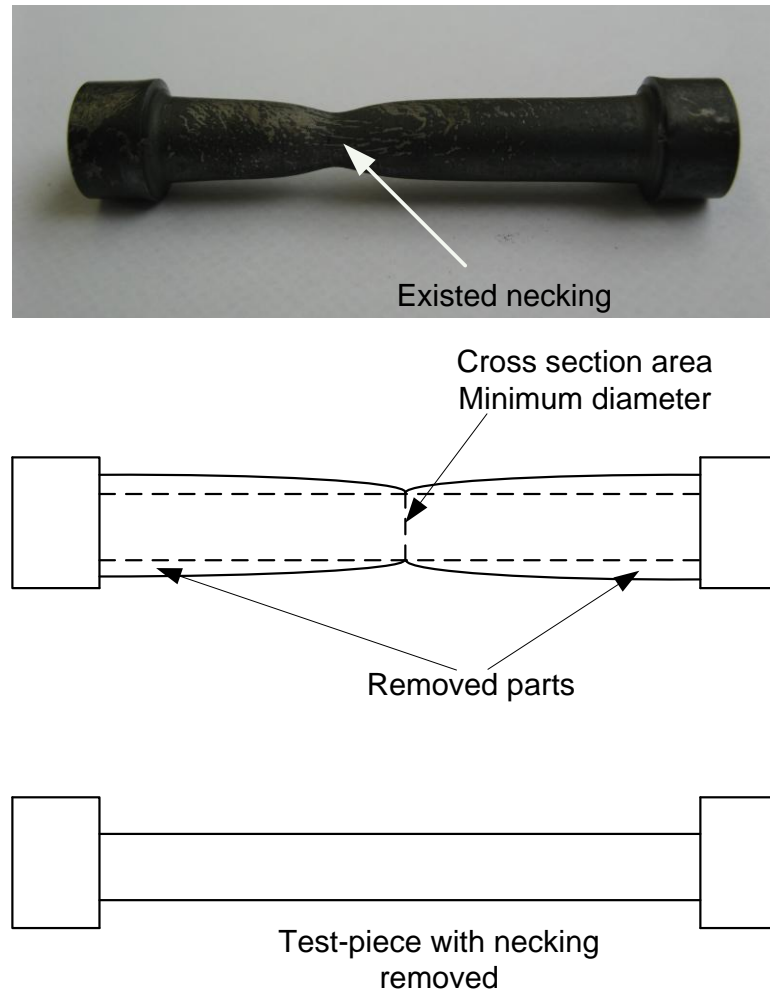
(a) Test-piece with existed necking after first step cold tensile test. (b) a diagram showing the necking removing process.
